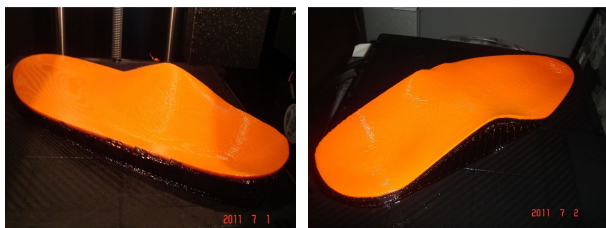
Manufacturing corrective insoles using rapid prototyping method (flat foot-left, hollow foot-right)
